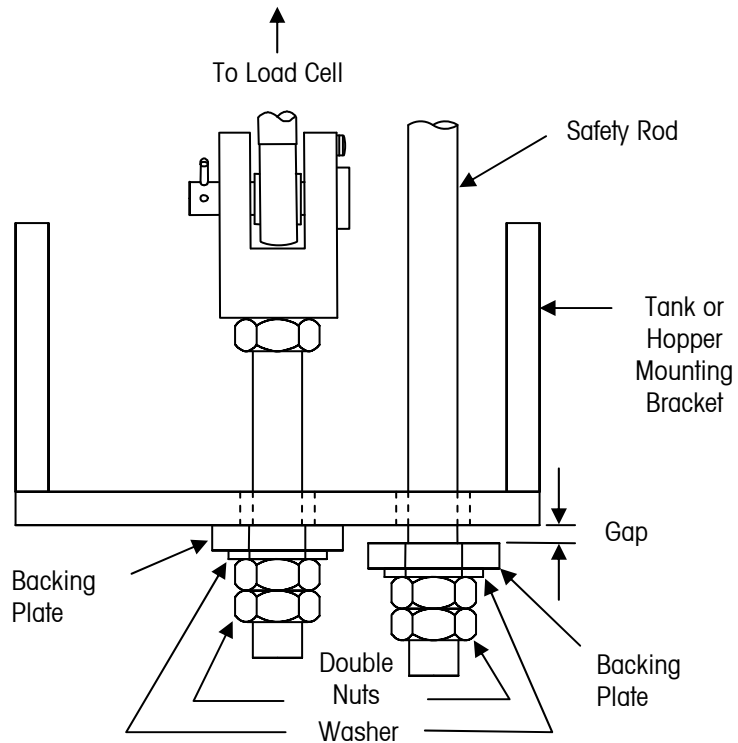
Weigh Module Assembly Attached to Lower Support Bracket
